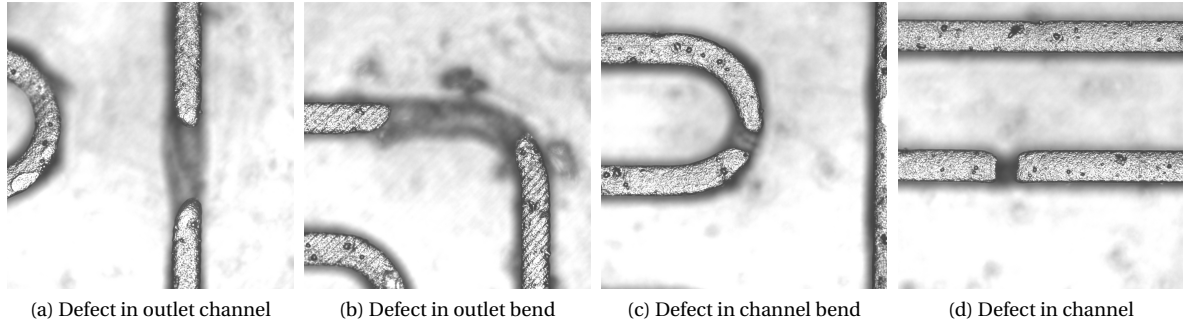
Defects in several places of the microfluidic device caused by the defects in the mould
